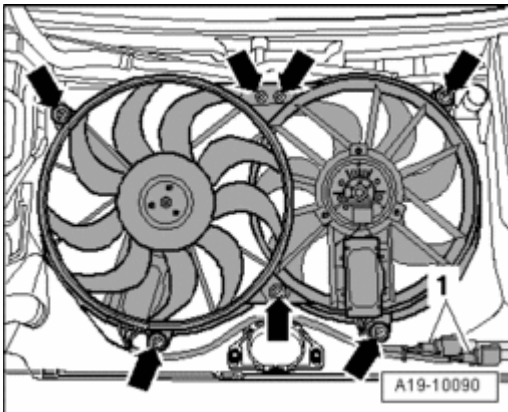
Removing Bolts And Fan Shroud Upward And Out
